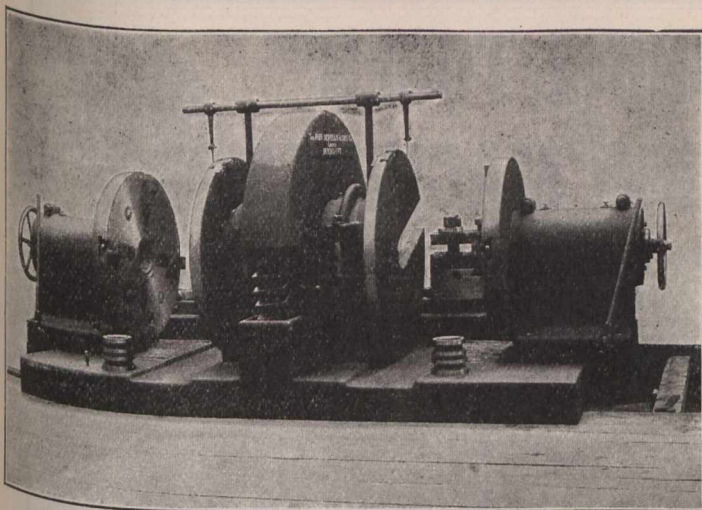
Locomotive and Coach Wheel Turning Lathe.
